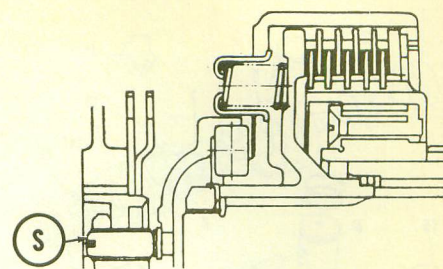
The clutch adjusting screw (S) is located under the small, round cover on engine left side cover.
